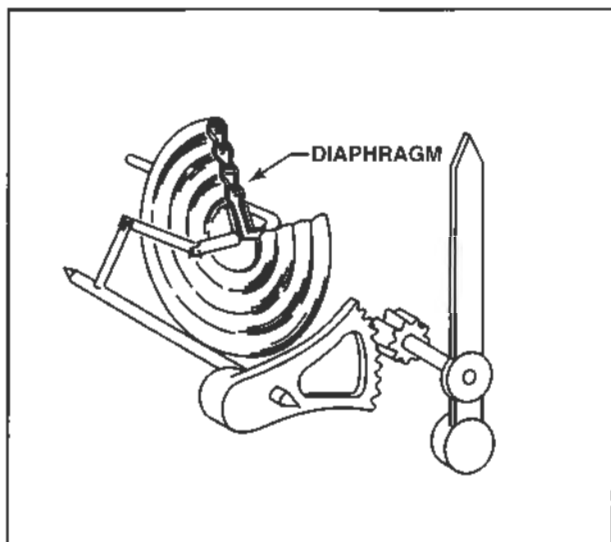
Pressure applied inside a diaphragm causes it to expand, rotating the sector gear. The sector gear moves the pinion gear attached to a pointer on a common shaft.
